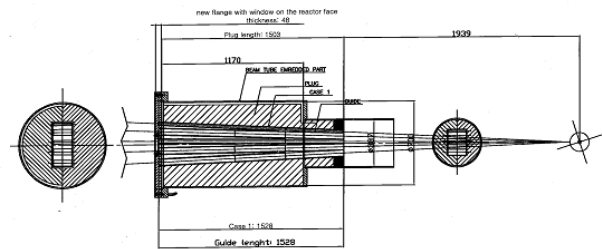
The in-pile plug assembly which includes a in-pile plug, a guide cassette, and five in-plug guides
